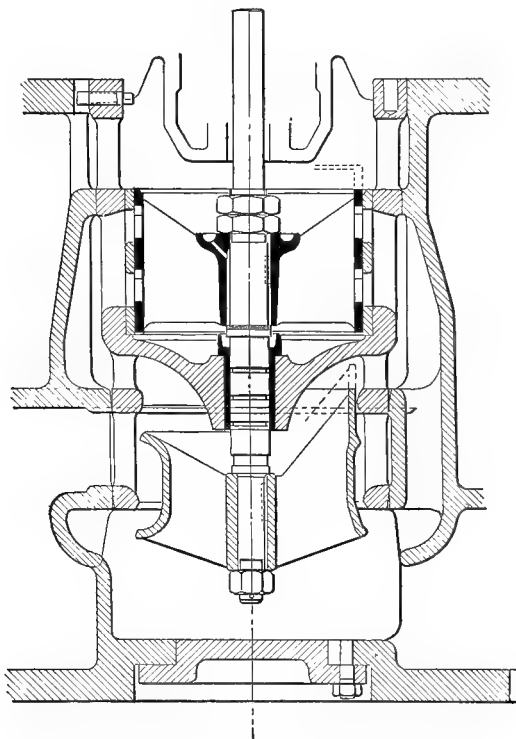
Balanced Gas Inlet Valve (Thyssen-Richter).
